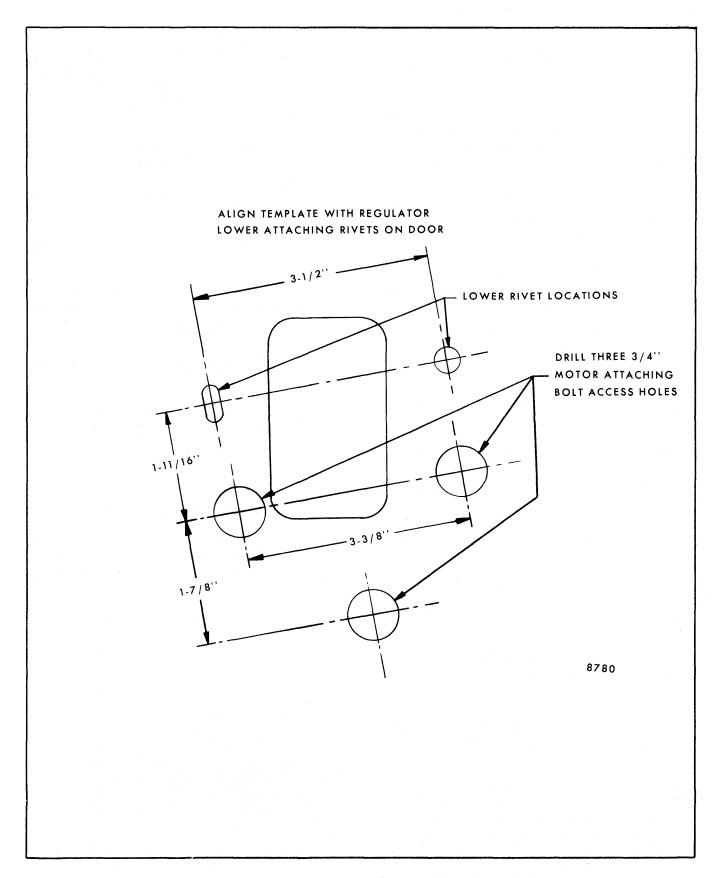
Window Regulator Lower Attaching Rivets Reference Point for Locating Window Motor to Regulator Attaching Bolts
